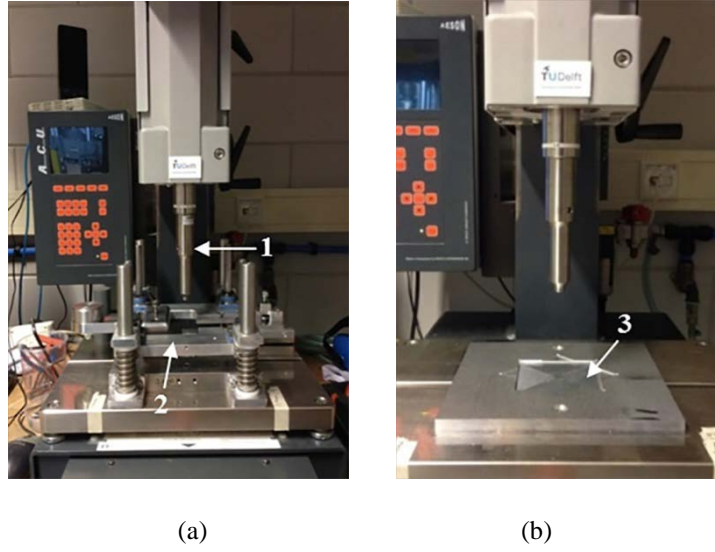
Ultrasonic welder and welding jigs used in this study. 1: circular sonotrode with a diameter of 10 mm, 2: welding jig for DLS specimens, 3: welding jig for PT specimens.
